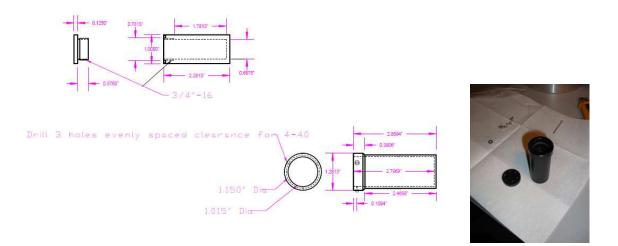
Delrin canister deployed into the center of the AV. Left: drawing of the inner and outer cans; right: photo with the inner can inside of the outer can.
